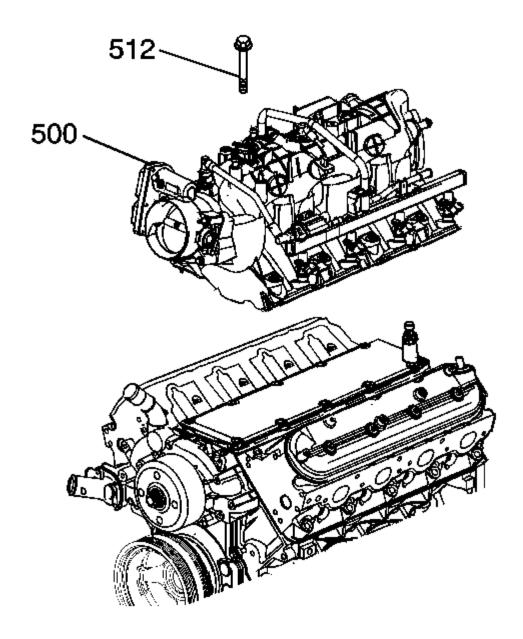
Removing/Installing Intake Manifold Bolts Courtesy of GENERAL MOTORS CORP.
